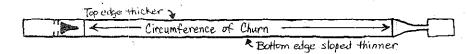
Mark the length of the circumference of the churn on an oak piece, allowing three extra inches on each end for the lock. The top edge (edge toward the small end of the churn) should be made thicker than the bottom edge for a tighter, fit. Use a pocketknife to smooth, if necessary.
